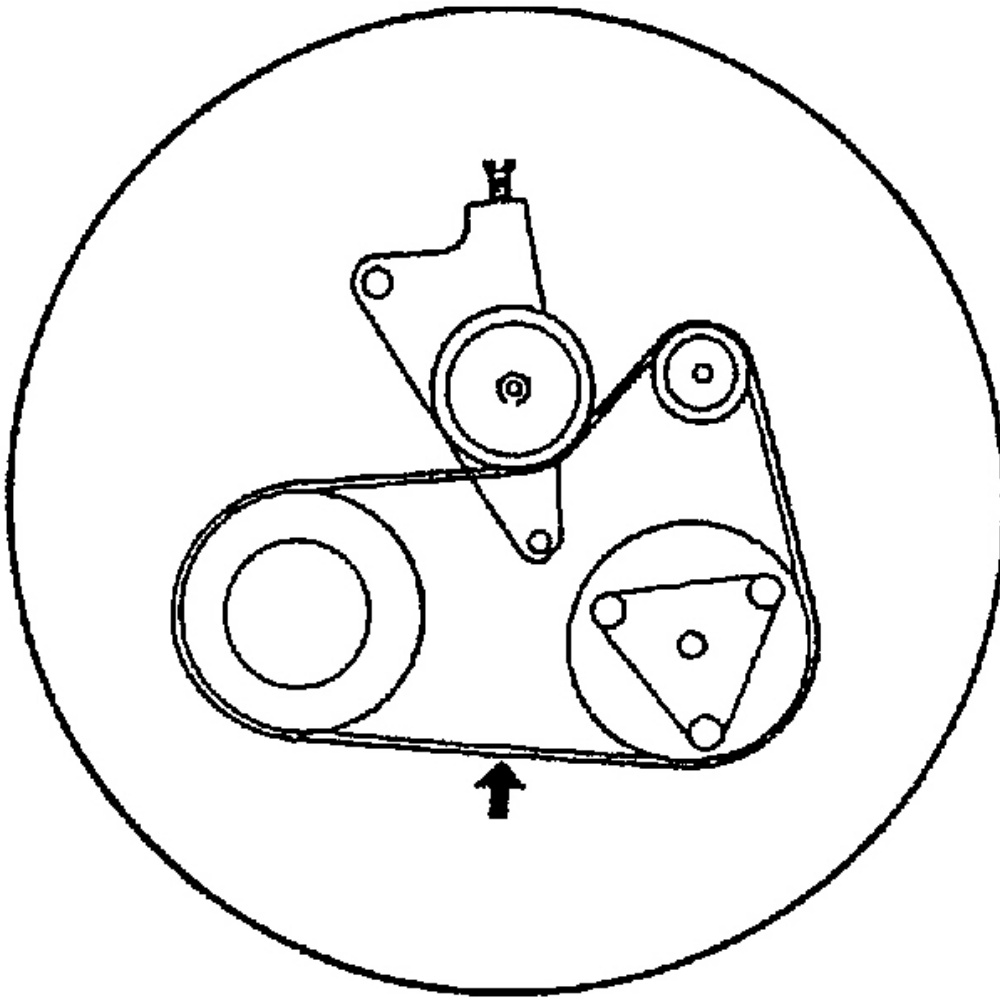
Identifying Drive Belt Routing & Deflection Check Point (2.0L, 2 Of 3)
